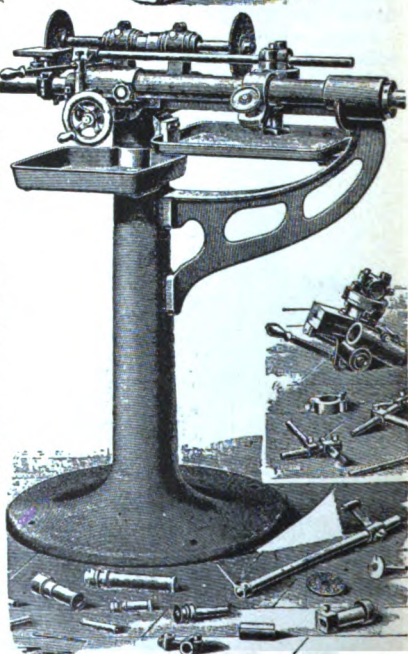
BROWN & SHARPE UNIVERSAL CUTTER AND REAMER GRINDER.
